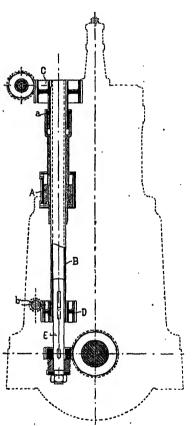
Diagram of Intermediate Vertical Shaft, with Servo-motor for displacing axially the Helical Wheels C and D when reversing Engine (Fiat).
